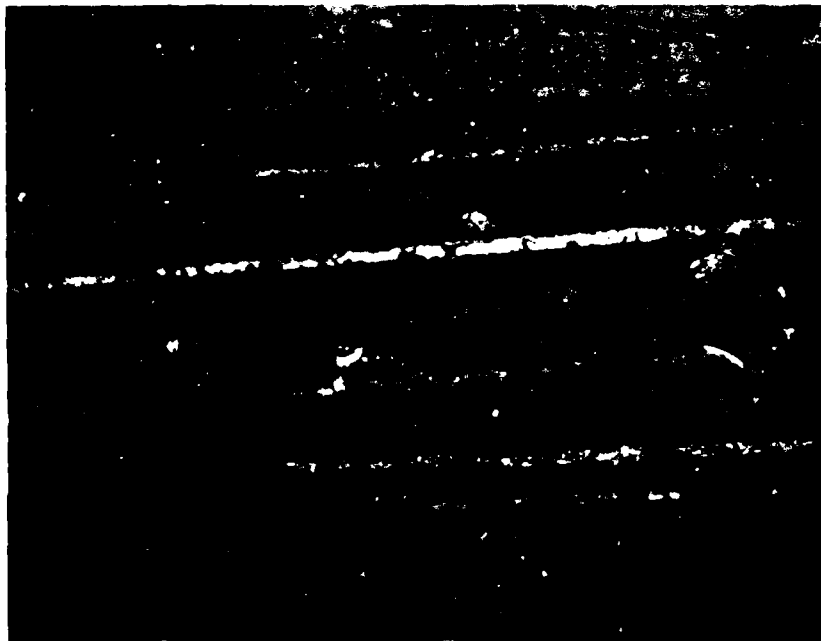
Crack Surface of 600 F Specimen C890403-11
